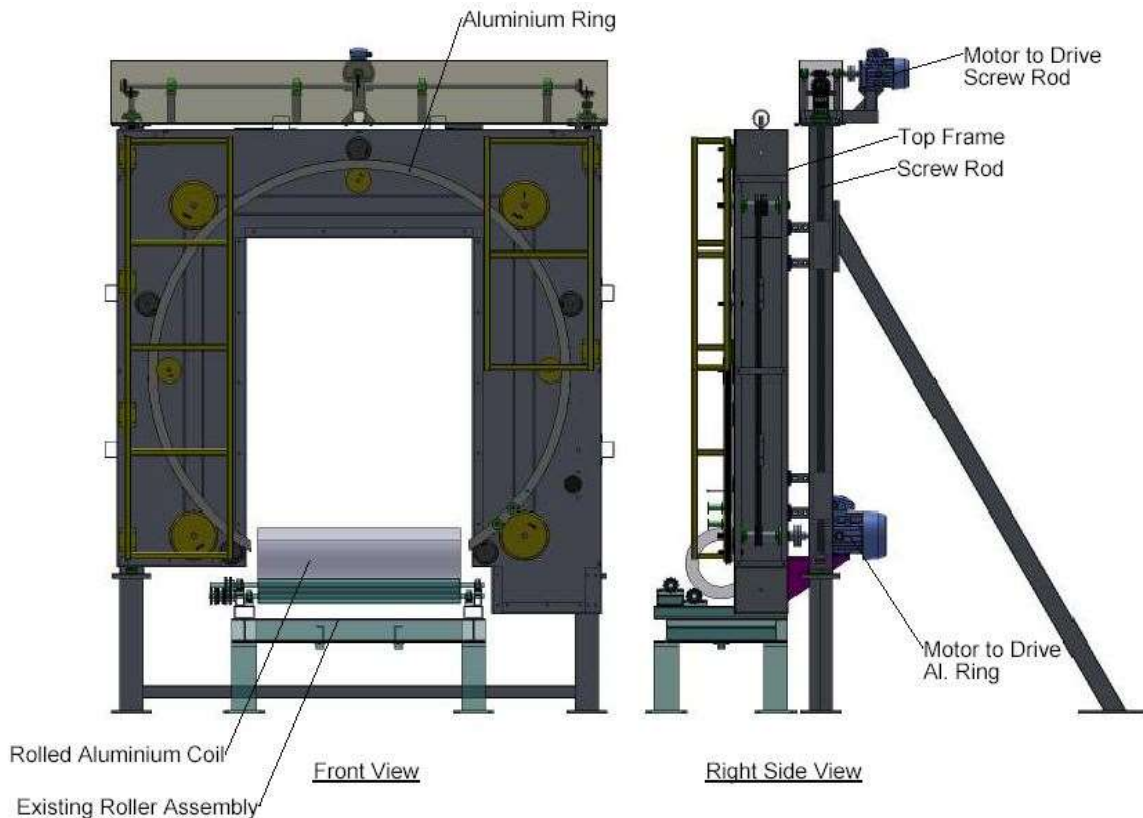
General Assembly of Heavy Coil Wrapping Machine
